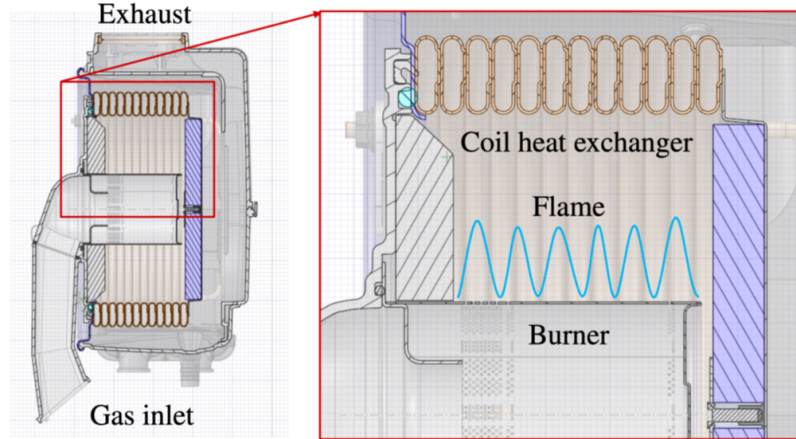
Schematic cross-section of a residential condensing boiler courtesy of Nefit|Bosch Thermotechniek B.V. The design of this boiler is similar to the system investigated in this work.
